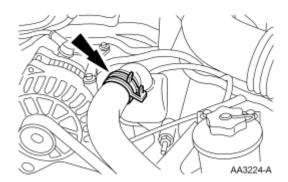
Upper Radiator Hose Courtesy of FORD MOTOR CO.
